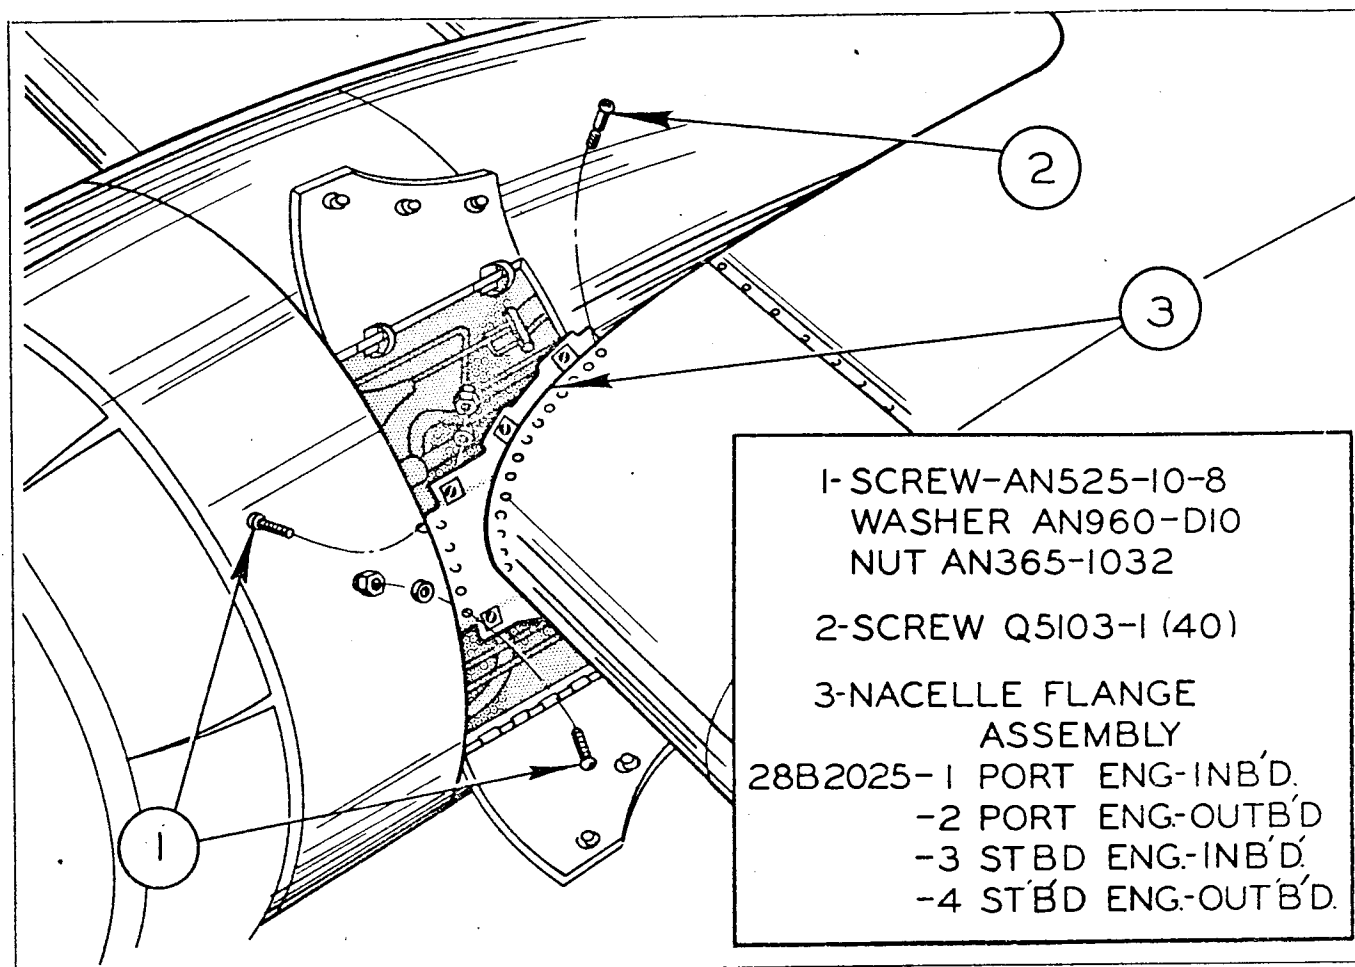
Screw Diagram—Leading Edge—Nacelle Flange Assembly
